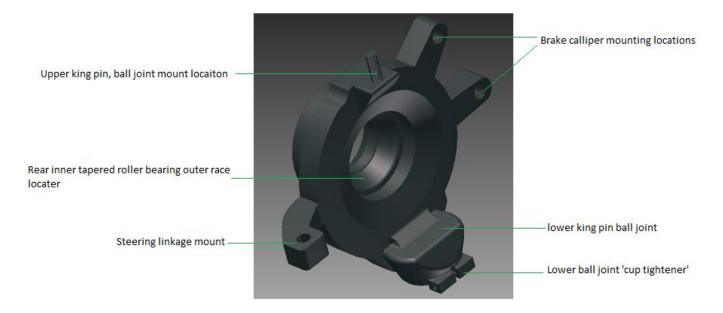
CAD image showing front right steering knuckle (hub carrier).
